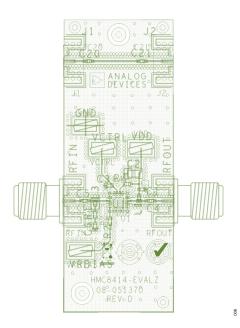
HMC8414-EVALZ Assembly Drawing (J1 and J2 Are Not Installed)
